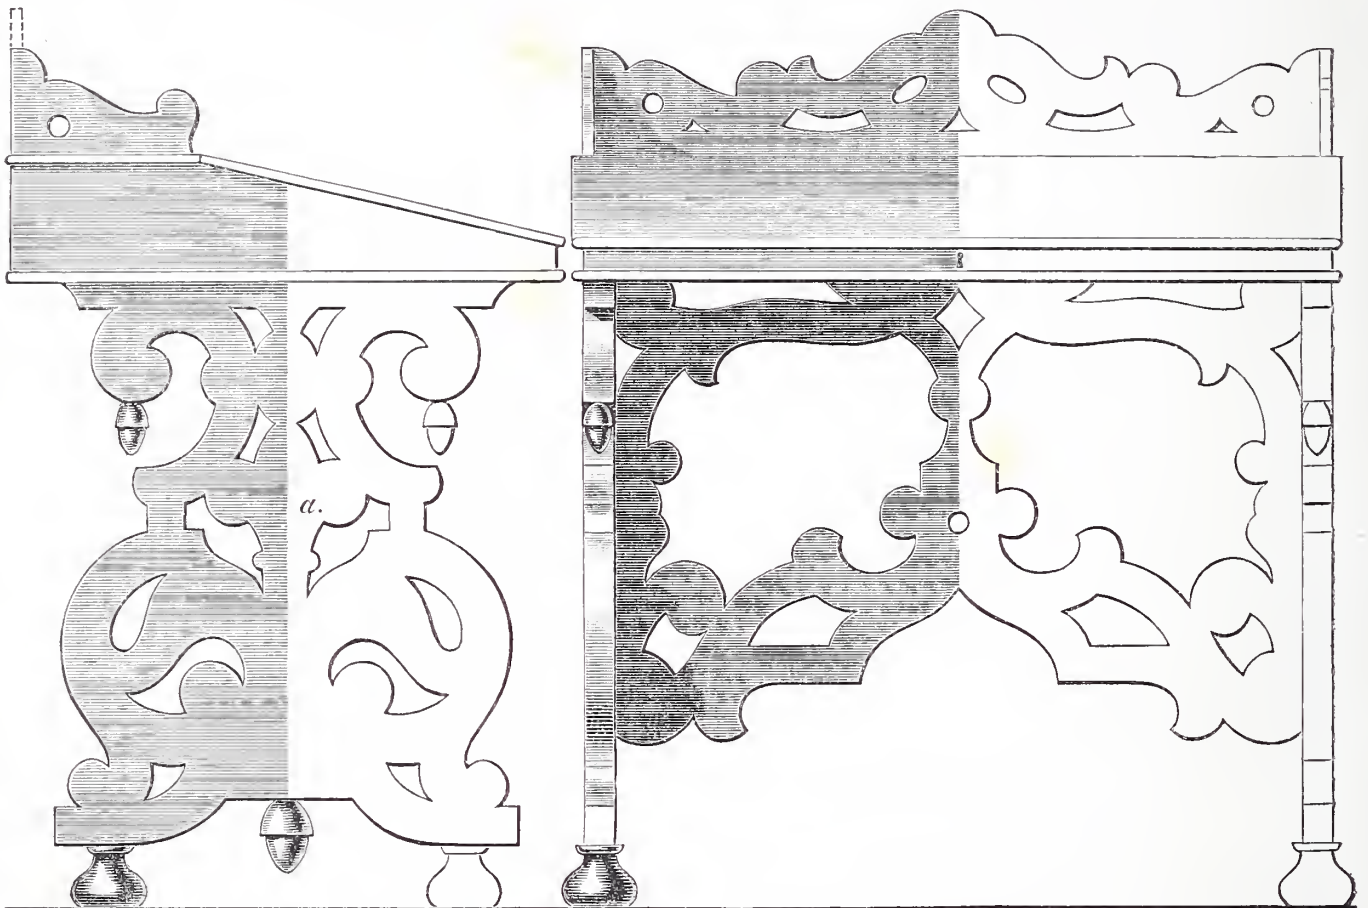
Davenport in Papier-Mâché: Front Elevation.
